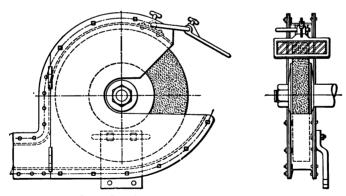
Riveted steel hood, with exhaust connection and glass shield for the protection of operator's eyes.
